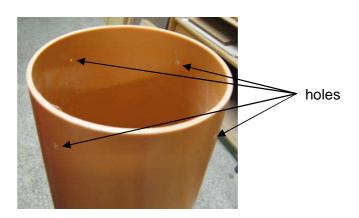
Model for drilling holes Figure 5: Positions of the holes. Cut galvanized threaded M4 rods to 31 cm length (Figure 6).
